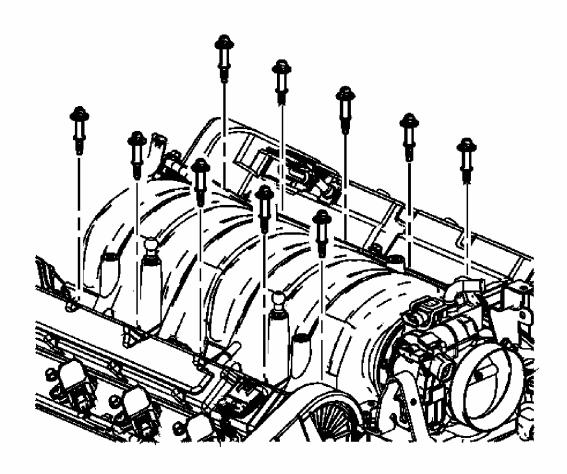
Identifying Intake Manifold Bolts Courtesy of GENERAL MOTORS CORP.
